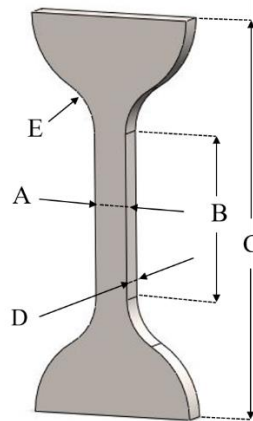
Sub-scale tensile specimen shown with symbolic dimensions.
